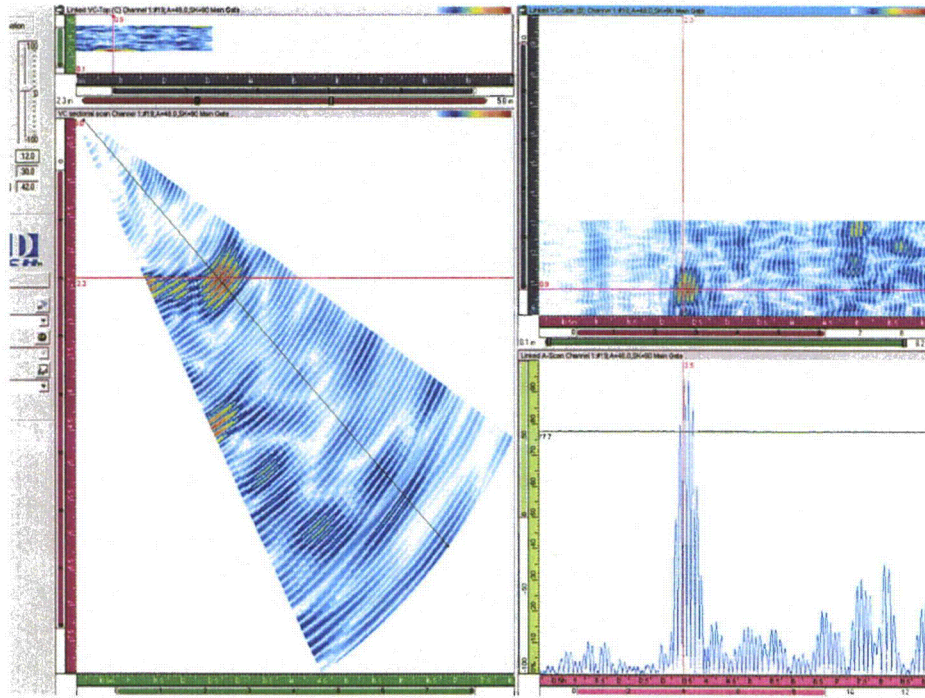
B515 as Inspected from the Columnar Side of the Weld, Showing a Yes Detected
